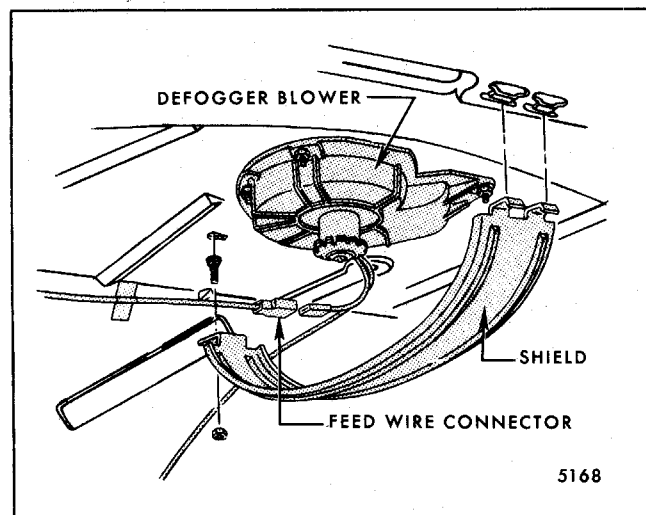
Back Window Defogger Blower Shield - "A" Styles
